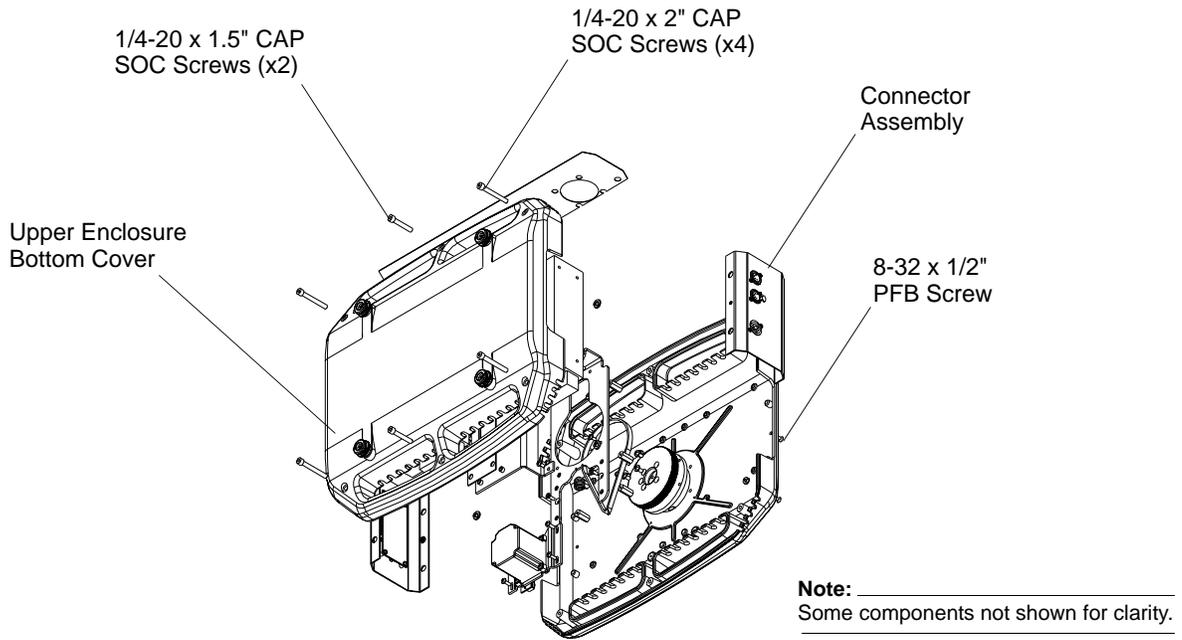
VLX Wash Upper Enclosure / DMX PCB Assembly
